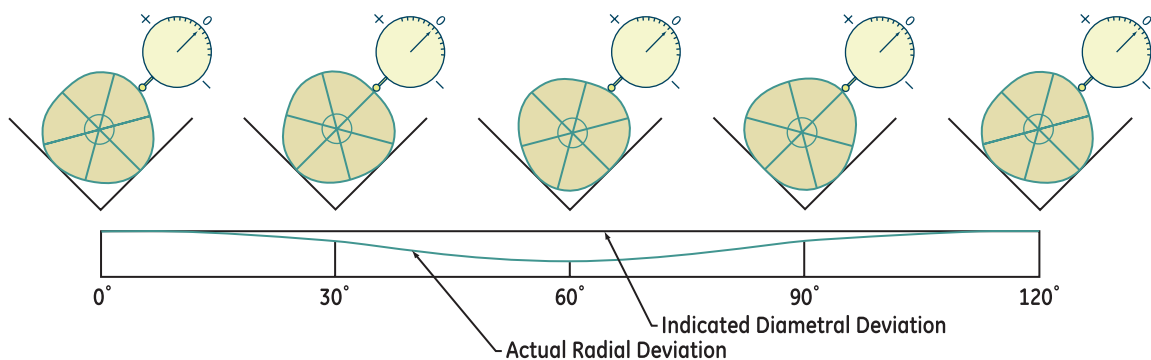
This 3-lobed shaft appears to be perfectly round when mounted in v-blocks and measured with a dial indicator.
